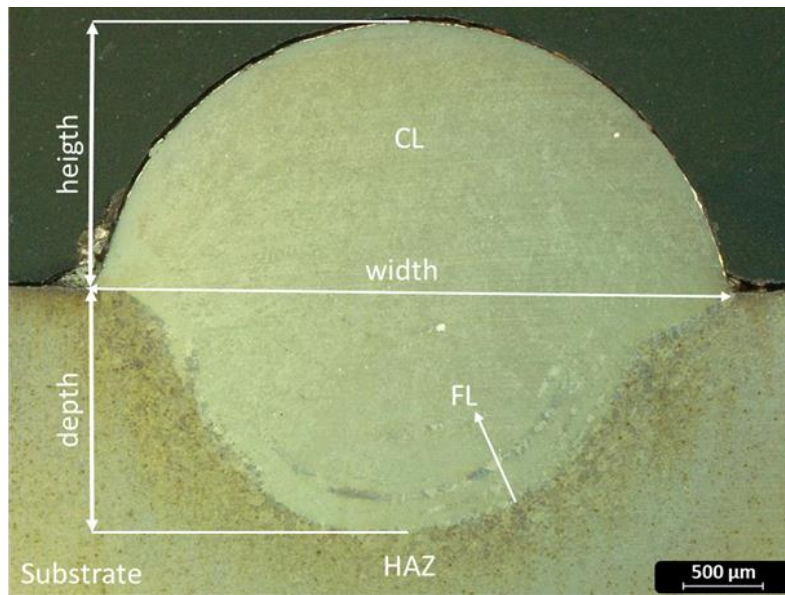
Optical microscopy image showing the morphology of a single-track clad produced by the DLD technique depositing Metco 42C powder on a 42CrMo4 steel substrate. CL—Cladding Layer; FL—Fusion Line; HAZ—Heat-affected Zone.
